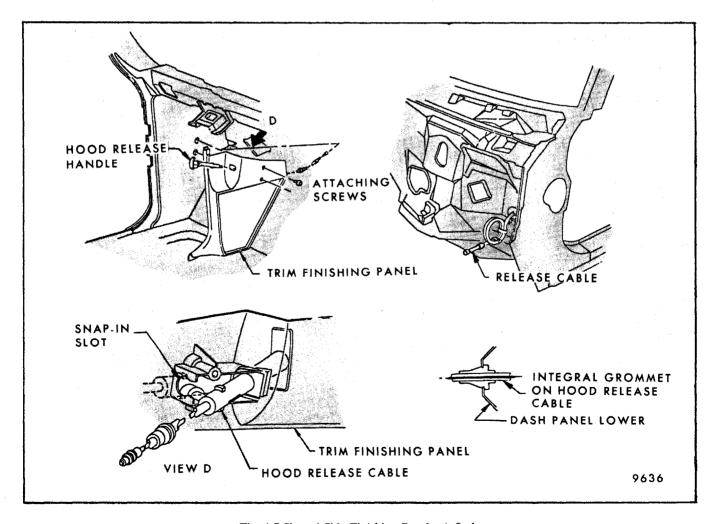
Shroud Side Finishing Panel - A Styles
